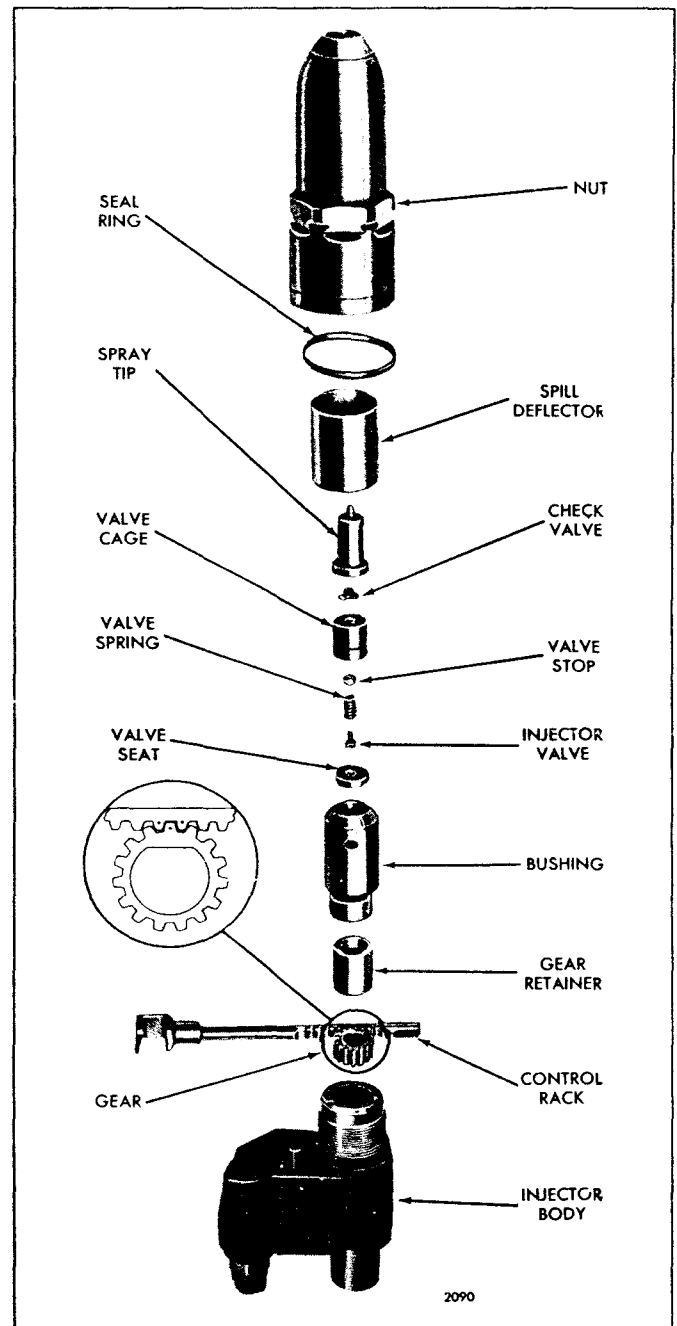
Injector Rack, Gear, Spray Tip and Valve Assembly Details and Relative Location of Parts
